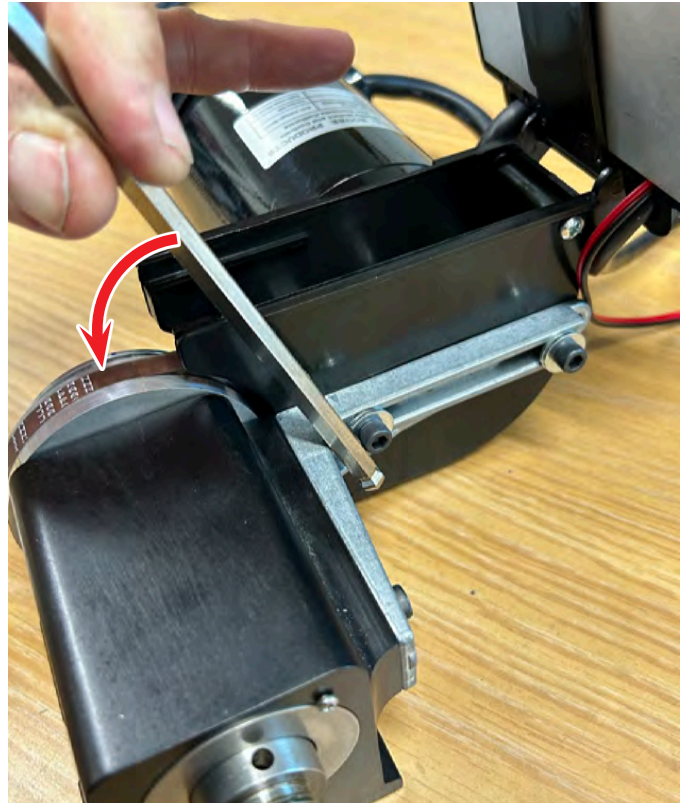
Pull back on the hex wrench in the direction of the red arrow to move the motor away from the headstock.
